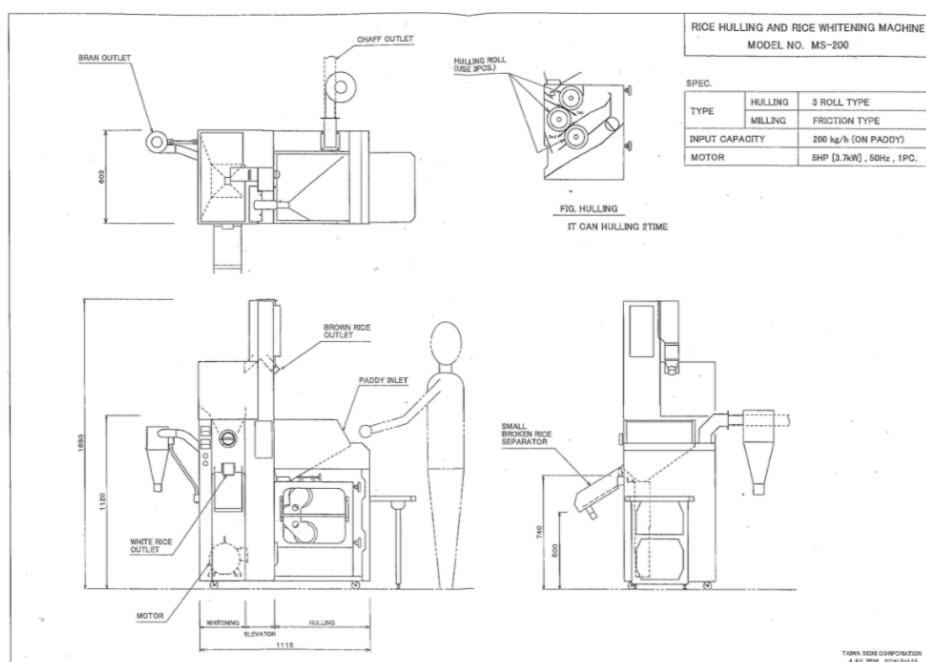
Drawing of Hulling and Milling Machine (Basic Model)
